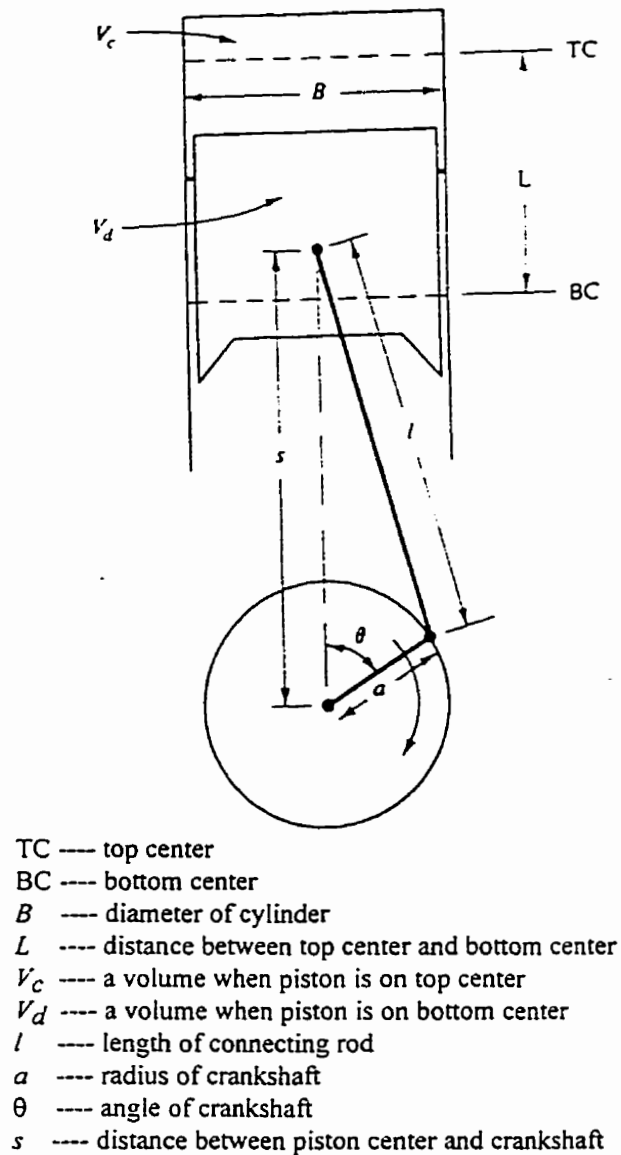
Geometry of cylinder, piston and crankshaft ,
